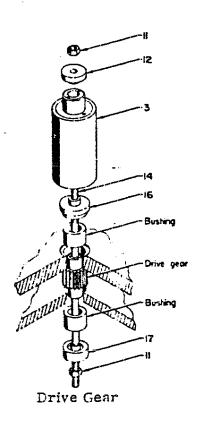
Pinion Gear and Drive Gear Bushing Installation
